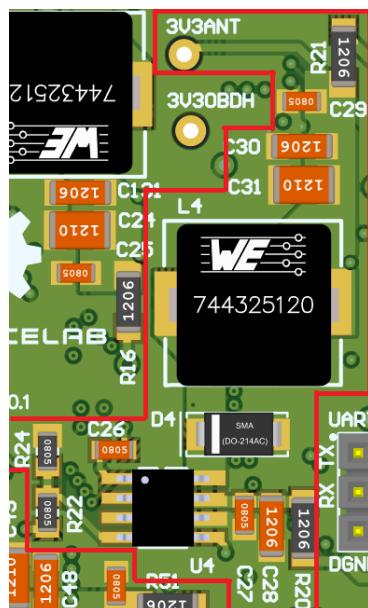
Antenna deployer regulator circuit on the PCB.
